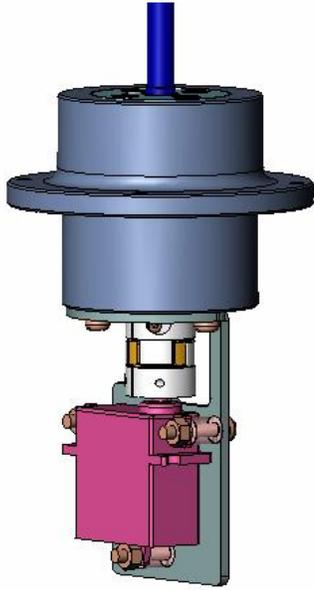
Integrated module of shaft seal with bracket holding coupler and micro-actuator
